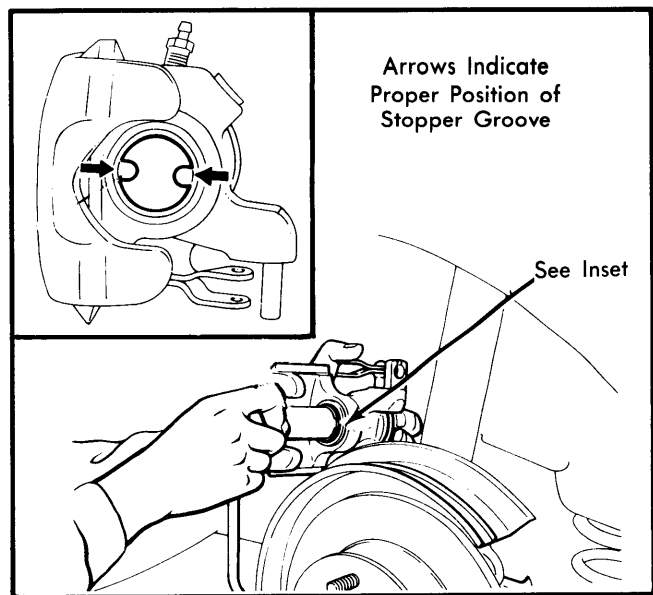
Positioning of Piston Stopper Groove on Rear Disc Brakes
